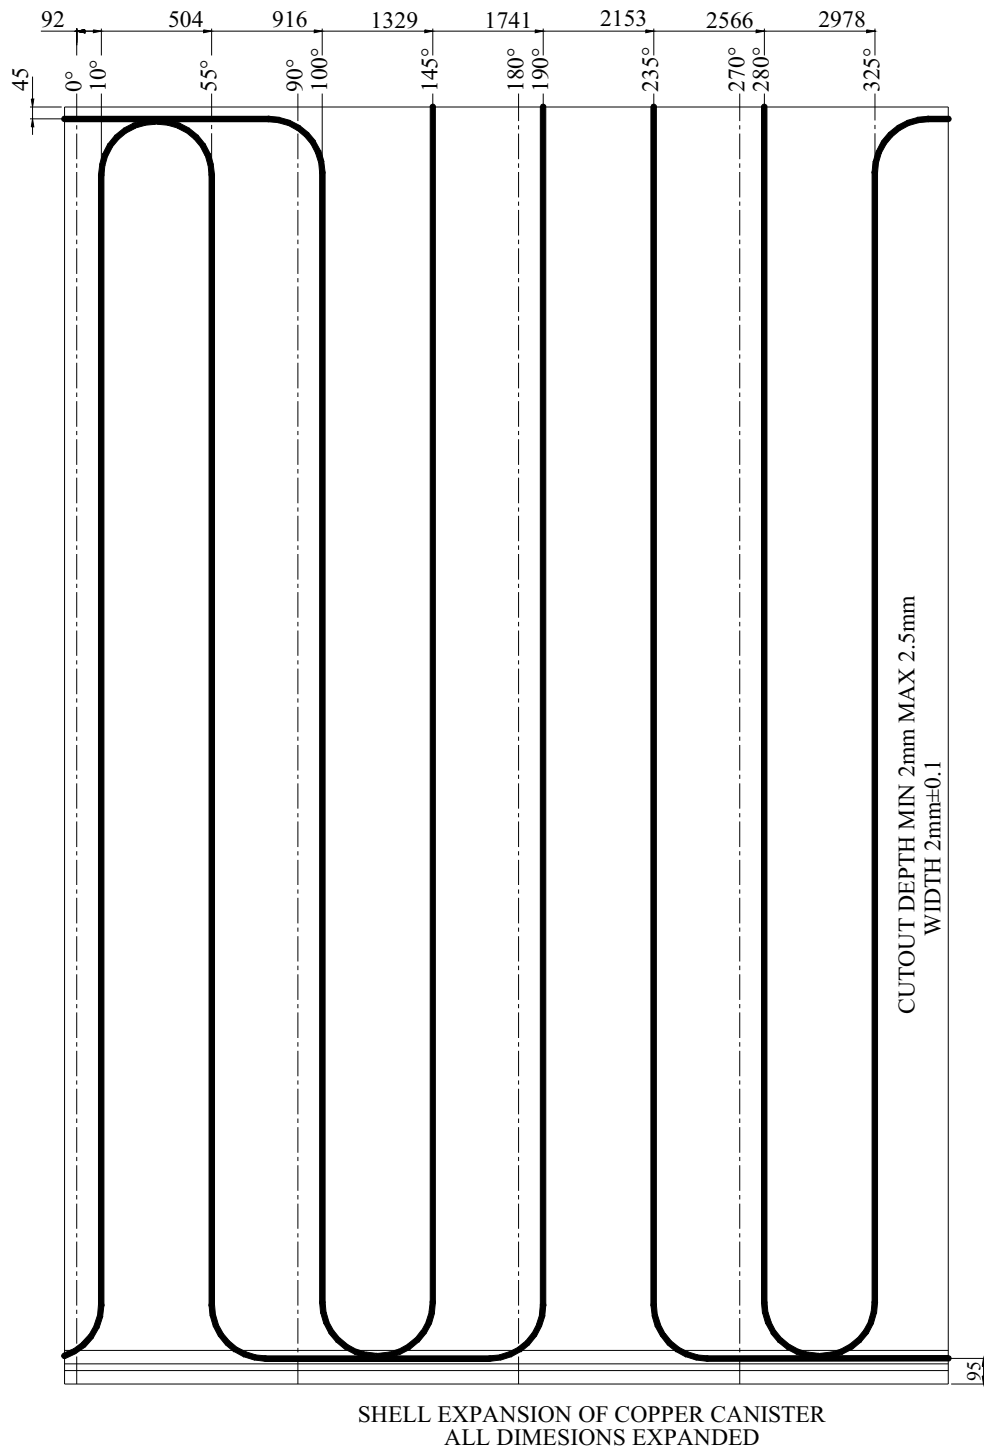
Laying of the optical fiber cables with protection tube of Inconel 625 (outer diameter 2 mm) for measurement of the canister surface temperature (surface unfolded)
